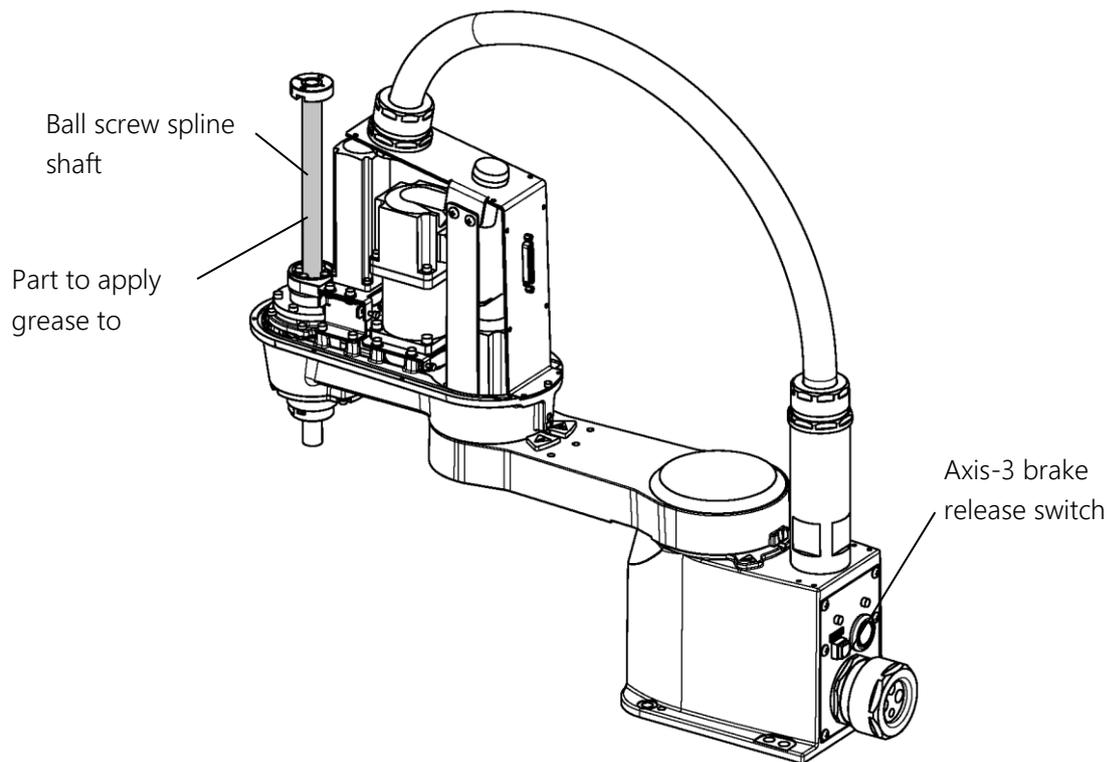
Greasing up the upper side of the ball screw spline unit
